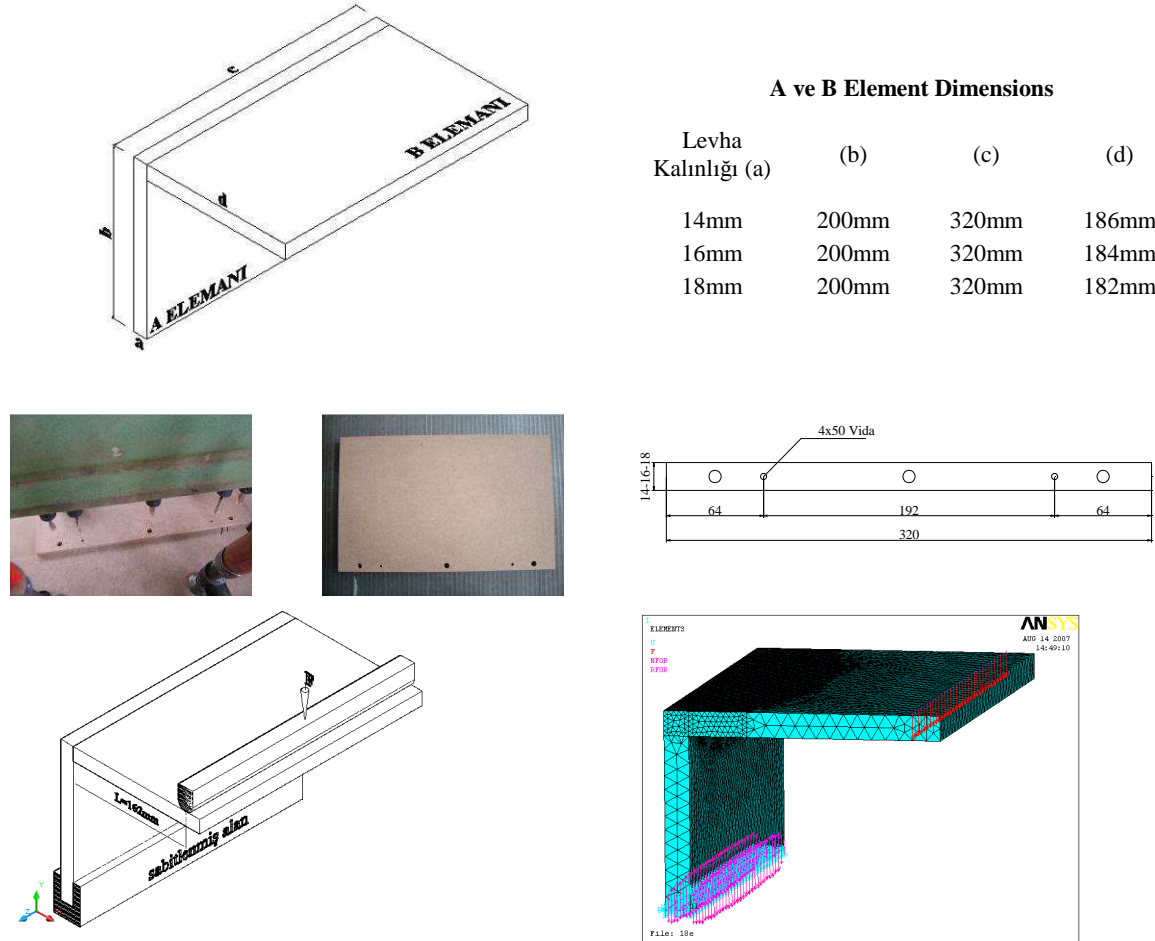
Dimensions of test samples, the dowel and hole centers (dimensions in mm) and Loading shape and experimental setup for bending experiments on “L” type joints.
